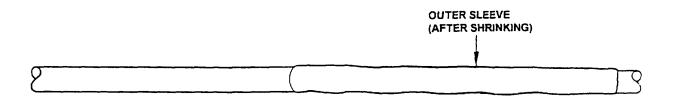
Double Shield Cable Repair with Mini-Seal Crimp Primary Splice (Sheet 3)
